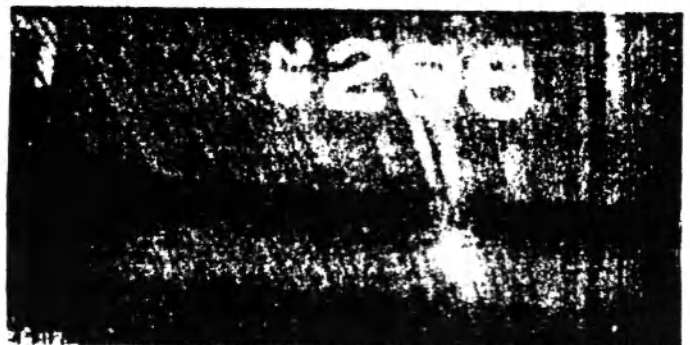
X-Ray Photograph : 14mm thick butt weld with proper interpass cleaning (Conventional MIG).
